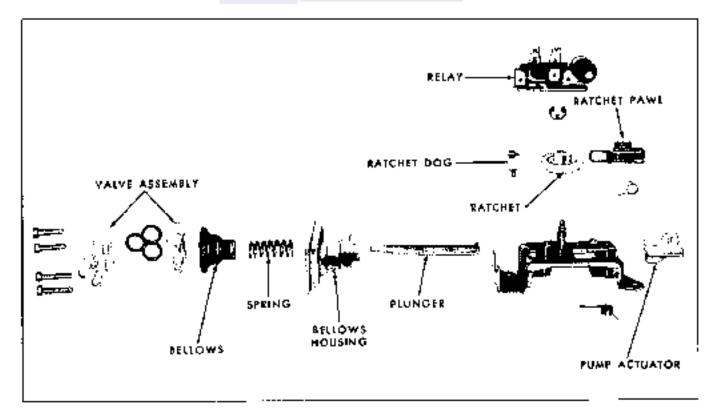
Expladed View Power Assembly-Tempest and Firebird
